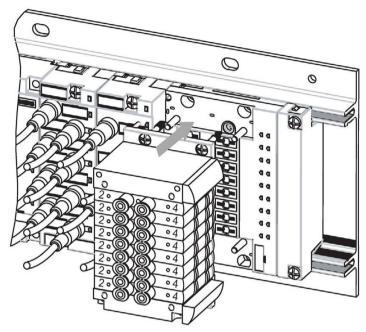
Mounting the FESTO valve terminal on the pneumatic interface module
